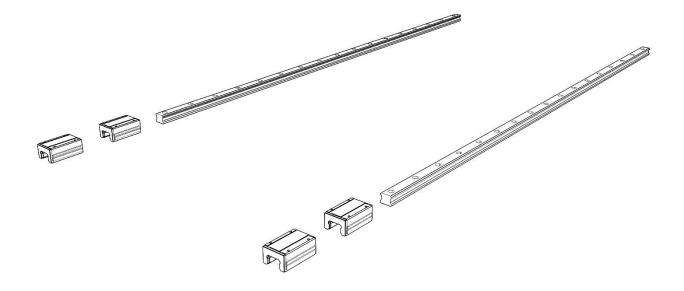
(ADDING THE LINEAR RAIL BLOCK BEARING)
